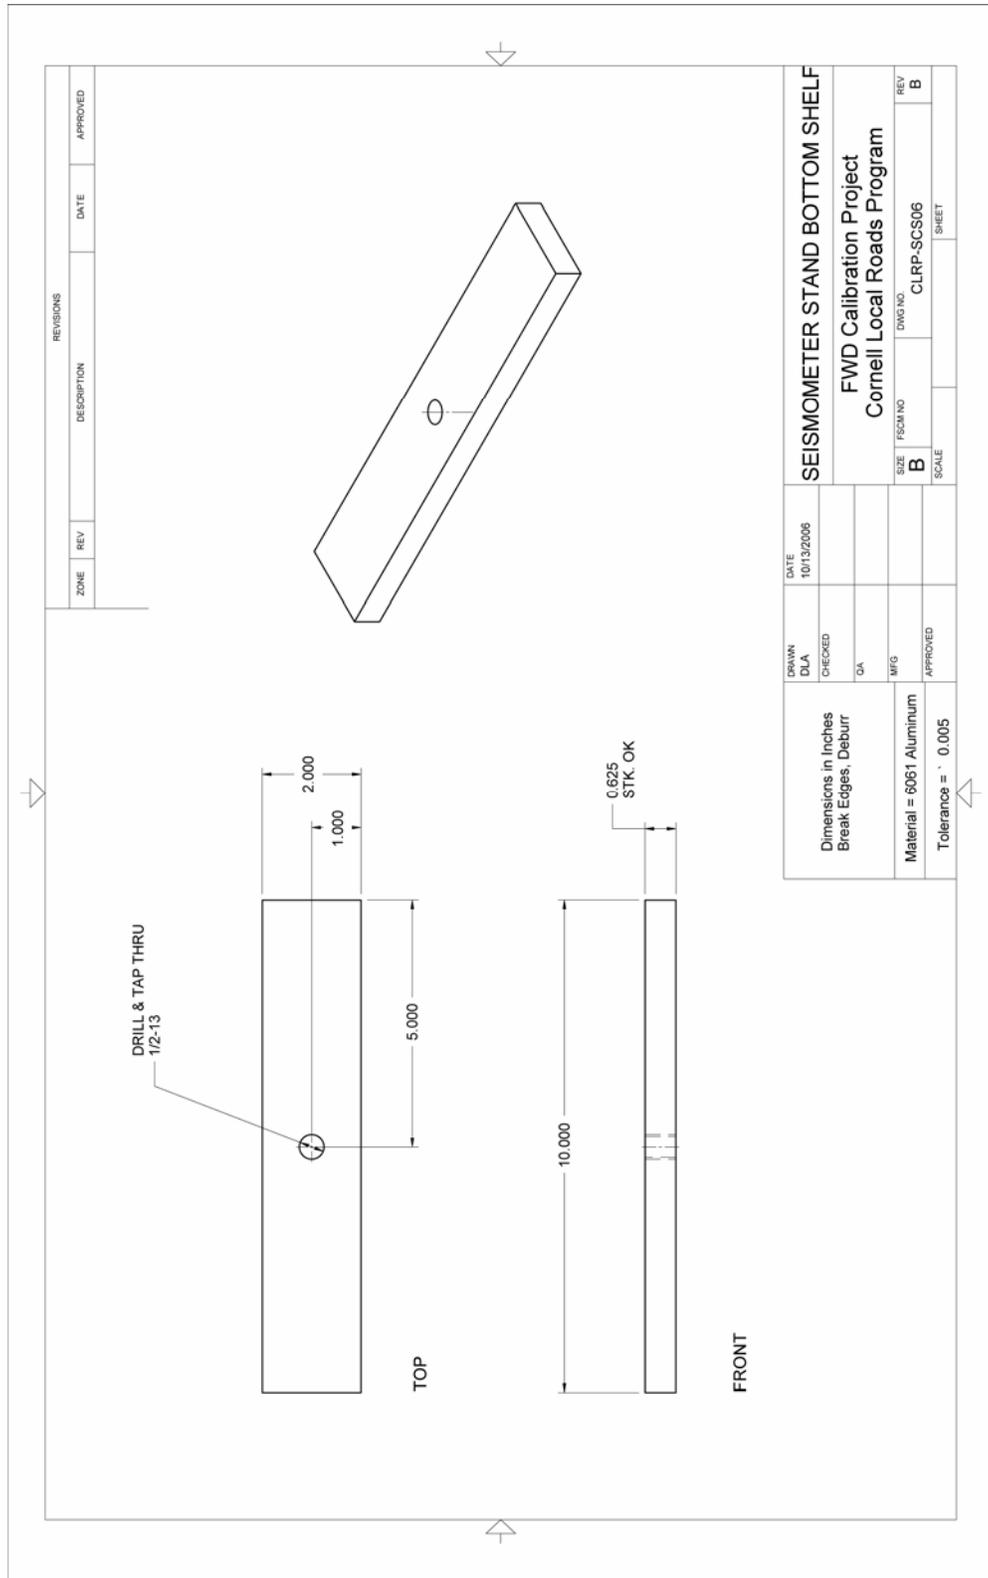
Drawing. CLRP-SCS06 Seismometer Stand Bottom Shelf.
